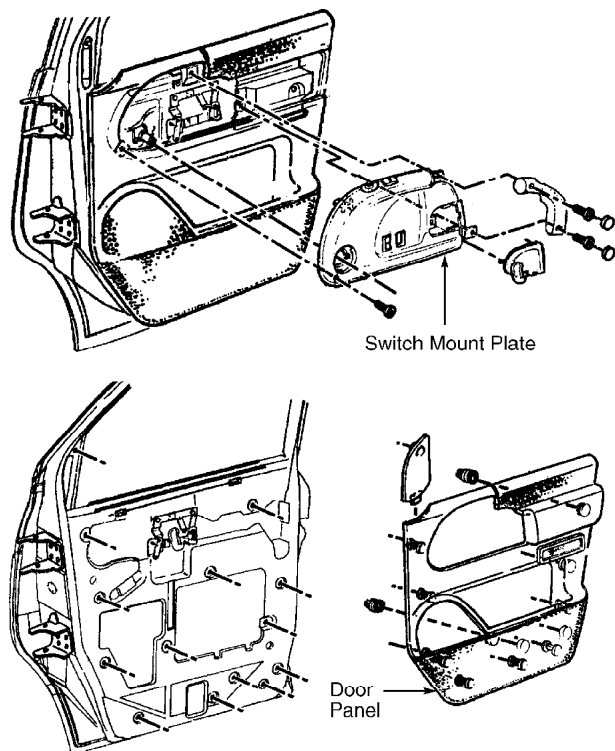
Removing Switch Mount Plate & Door Panel (Typical)
